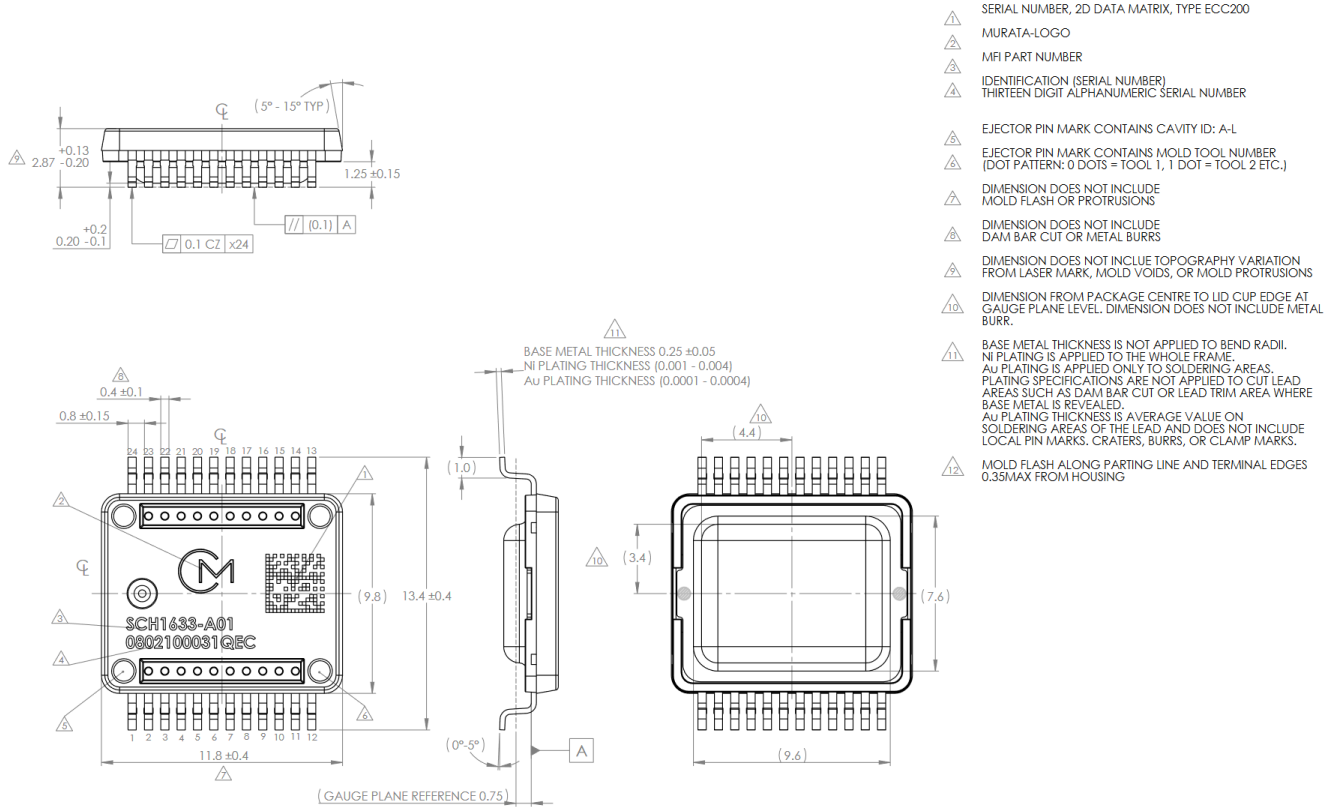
Outline of SOIC package. All dimensions are in millimeters. All angles are in degrees. Tolerances unless otherwise specified according to ISO2768-f. A sample part number for reference only.
